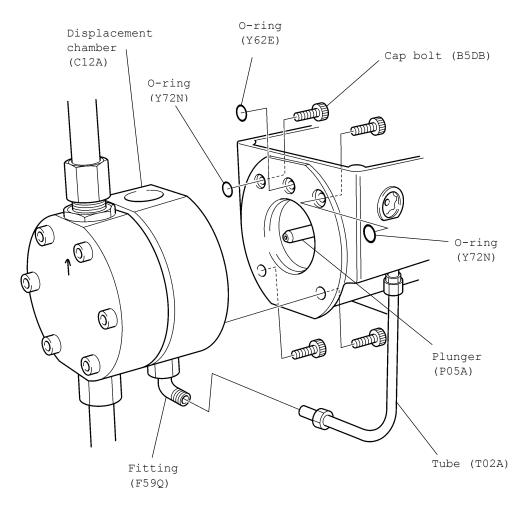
Removal of displacement chamber (DV-1.8)
